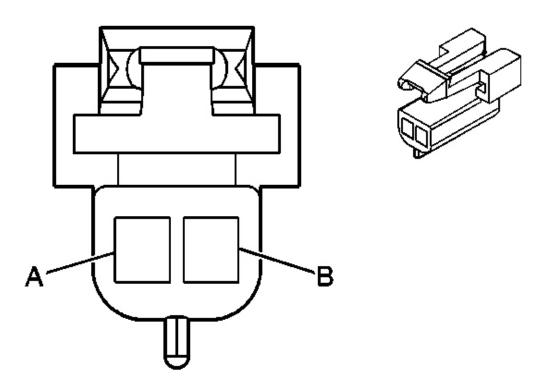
Speaker - Left Front Tweeter (UQA) Connector End View Courtesy of GENERAL MOTORS CORP.
